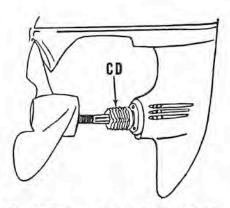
Lower unit gearcase with propeller removed showing the multiple disc drive clutch. Refer to text for details.
